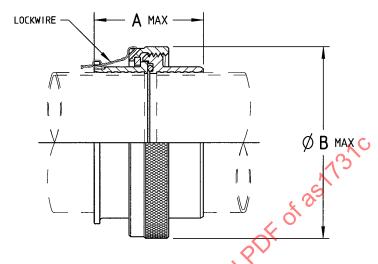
TYPE I COUPLING - ASSEMBLED VIEW
